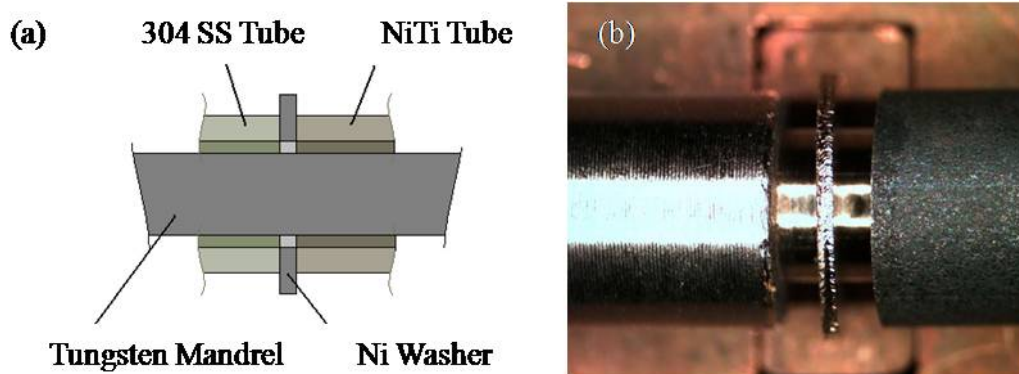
(a) Cutaway diagram of assembled 304 SS/NiTi tube sample; (b) Photograph of assembled sample before welding.
